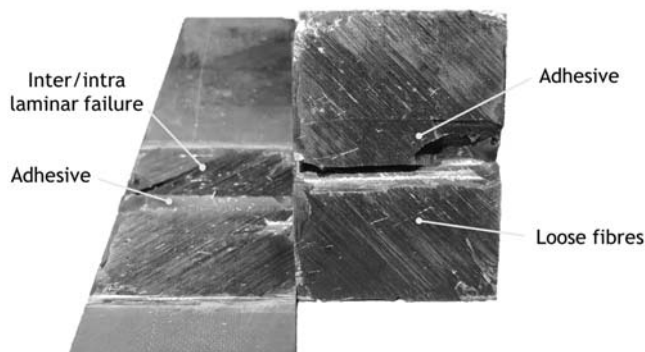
Typical fracture surface of type IV failure sequence.
